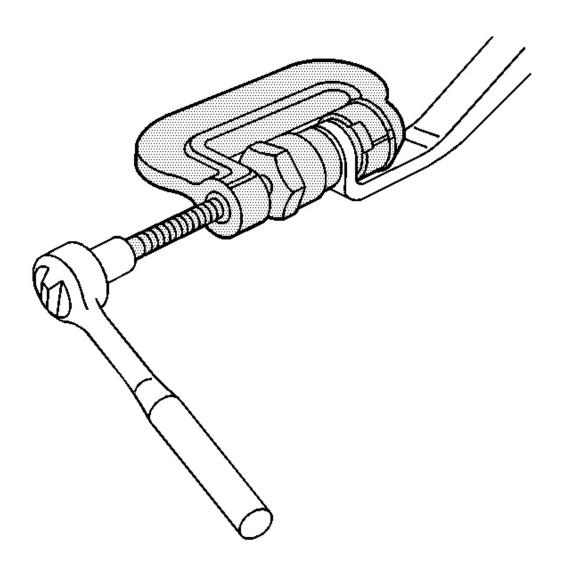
Installing Upper Ball Joint To Steering Knuckle Courtesy of GENERAL MOTORS CORP.
